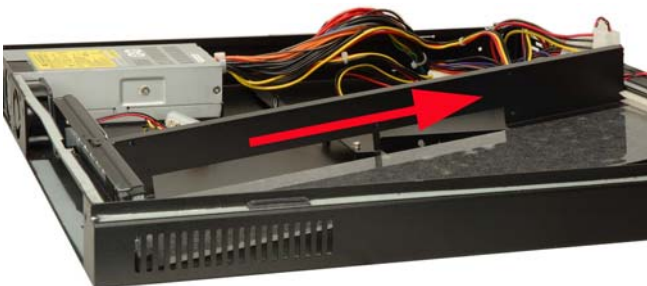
Slide the Backplane Bracket to the Front of the Chassis
